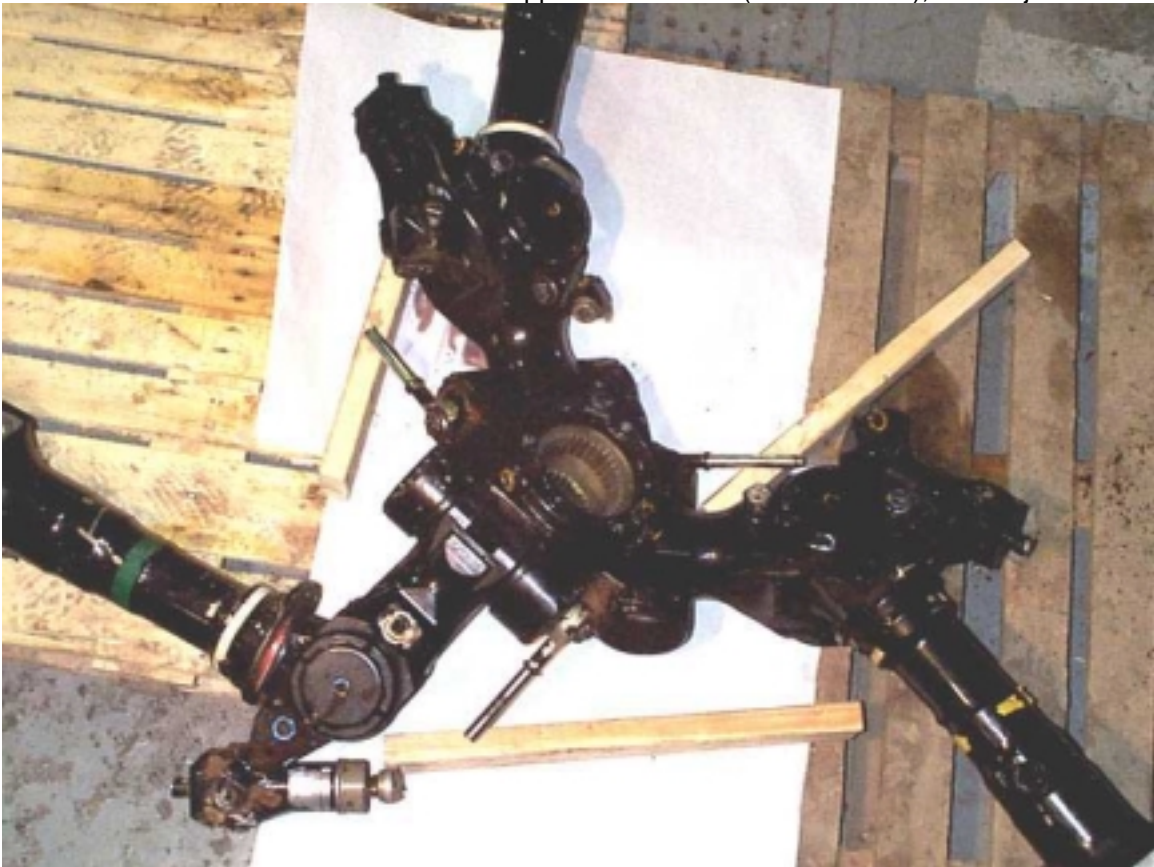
Rear Rotor Head - Note Damper Failures in full extension// Tête du rotor arrière; remarquez les défaillances des amortisseurs en extension complète
